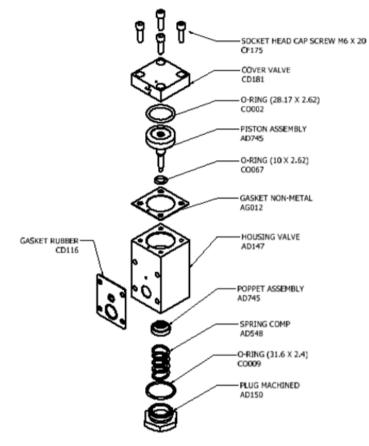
Exploded view of exhaust valve- Dryspell Plus models 20 and 30
